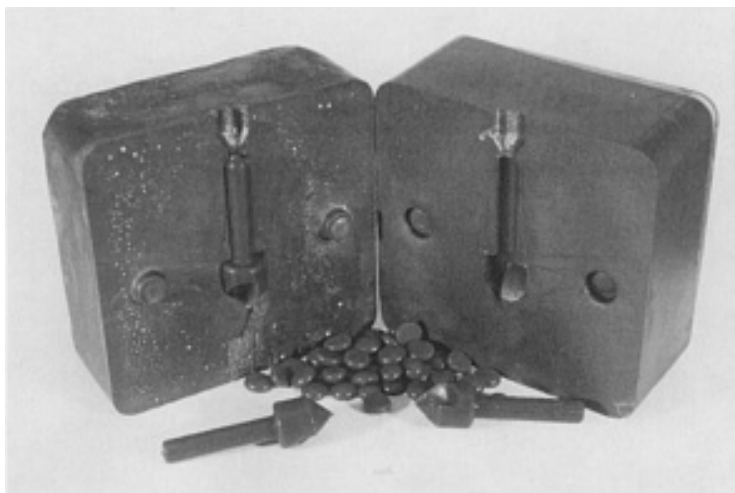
A rigid mold fabricated from filled epoxy for the production of M2 tool steel parts. Courtesy of J.A. Thomas and A. Griffo, The Pennsylvania State University
